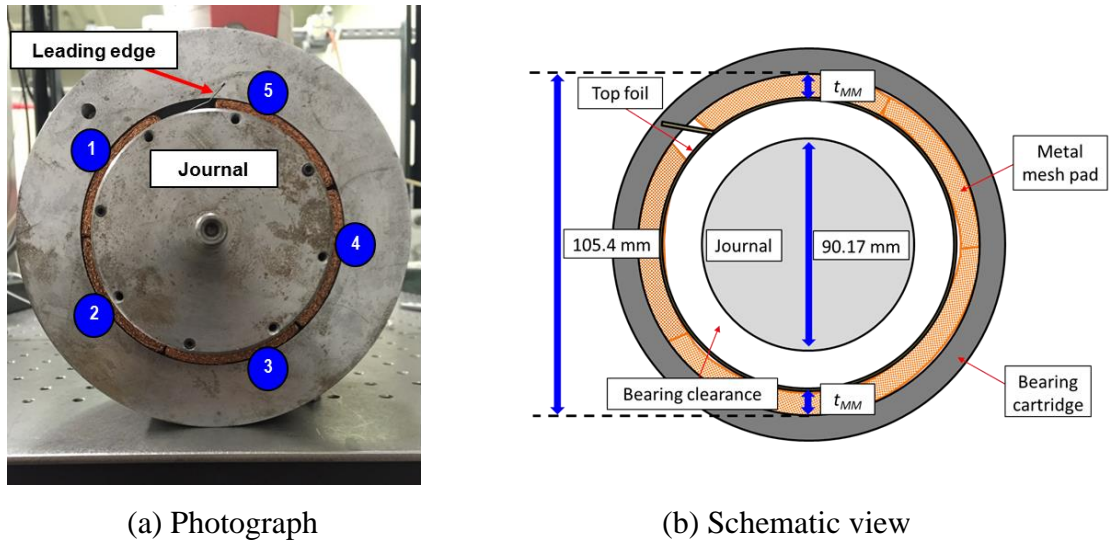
A (a) photograph and (b) a schematic view of an assembled metal mesh foil bearing with five metal mesh pads ($t_{MM} = 7.36$ mm).
